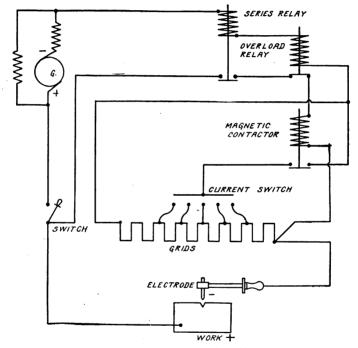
Wiring Diagram for C. & C. Welding System
